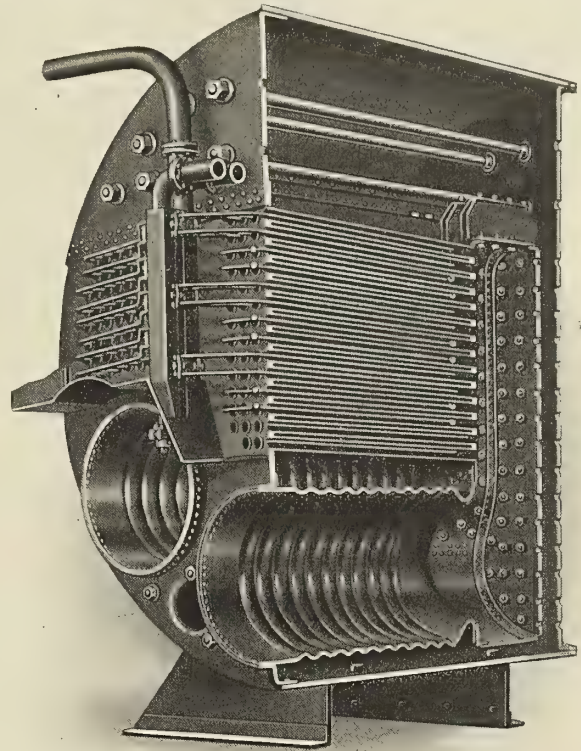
Sectional View, Showing Location of Superheater Elements in Fire Tubes
